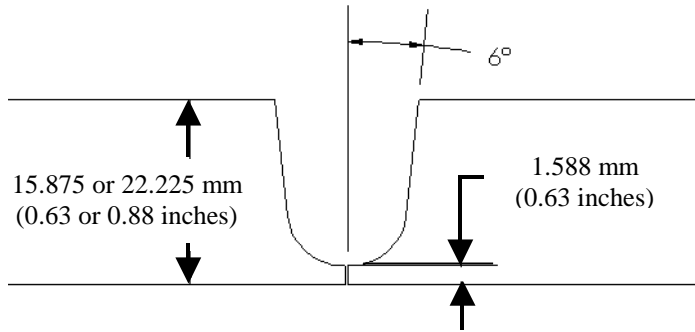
Hot Wire and Cold Wire GTAW Coupons
